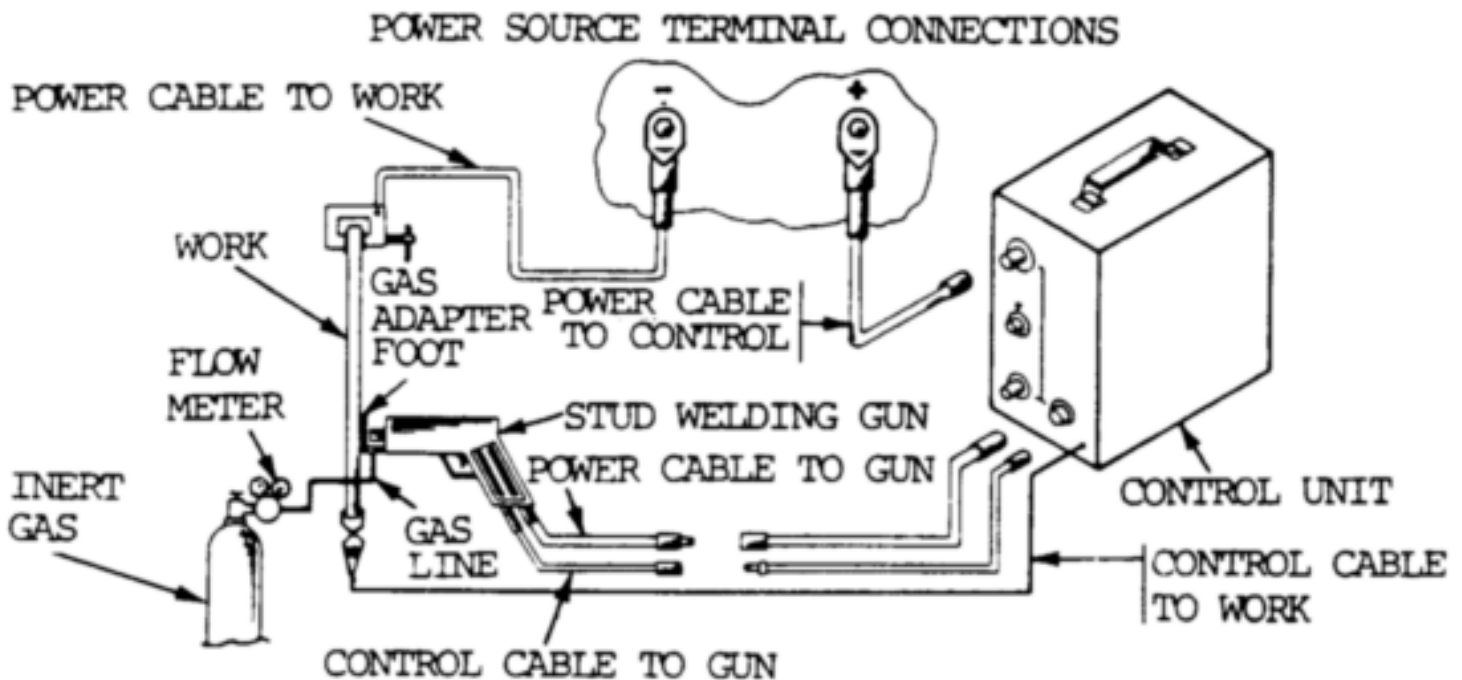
Equipment setup for gas shielded arc stud welding.
